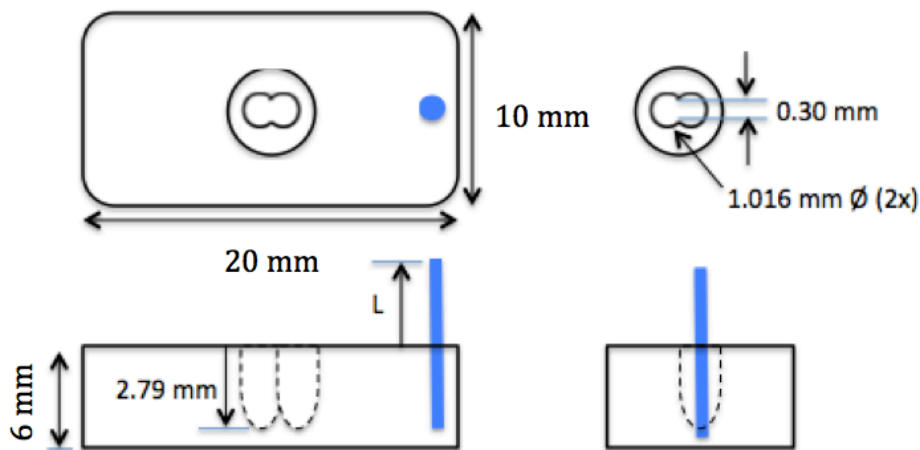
A detailed drawing of the polyurethane substrate with an embedded hair: top view, detailed view of housing chambers for oil and aqueous phases, front view, and side view
